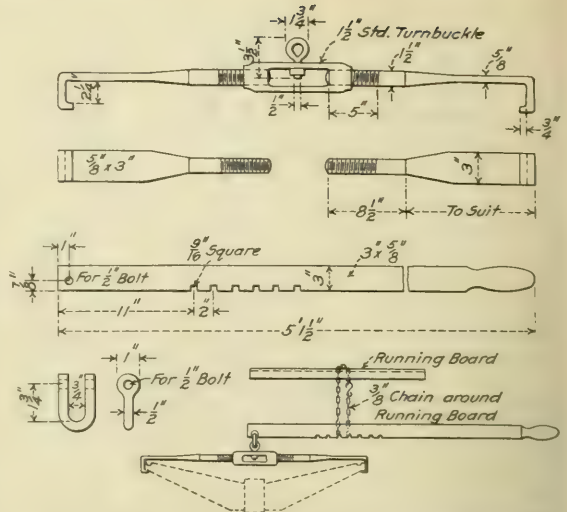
Lever and Clamp for Removing or Applying Driving Springs.
